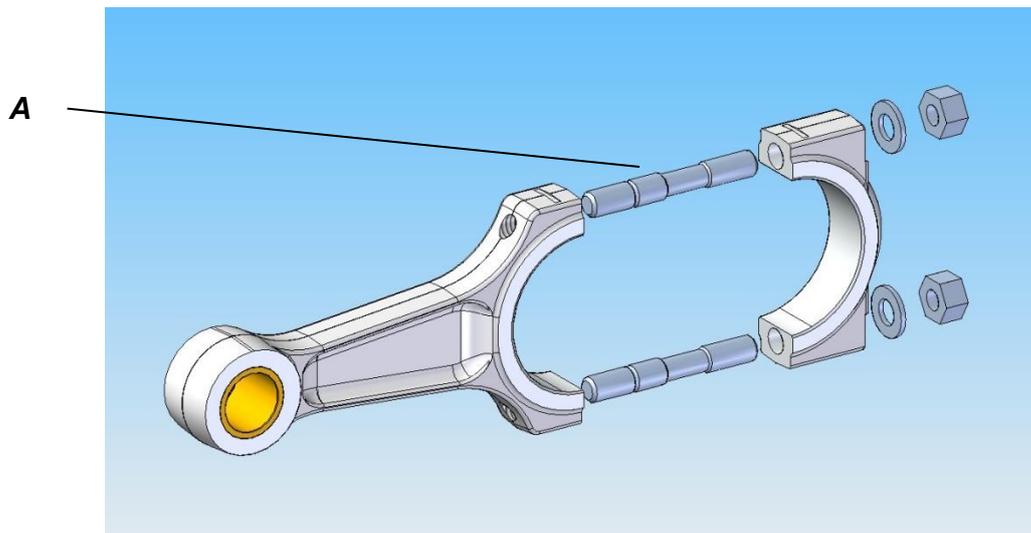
Connecting rod components for compressors PP4-L/H and all 6 and 8-cylinder-models
